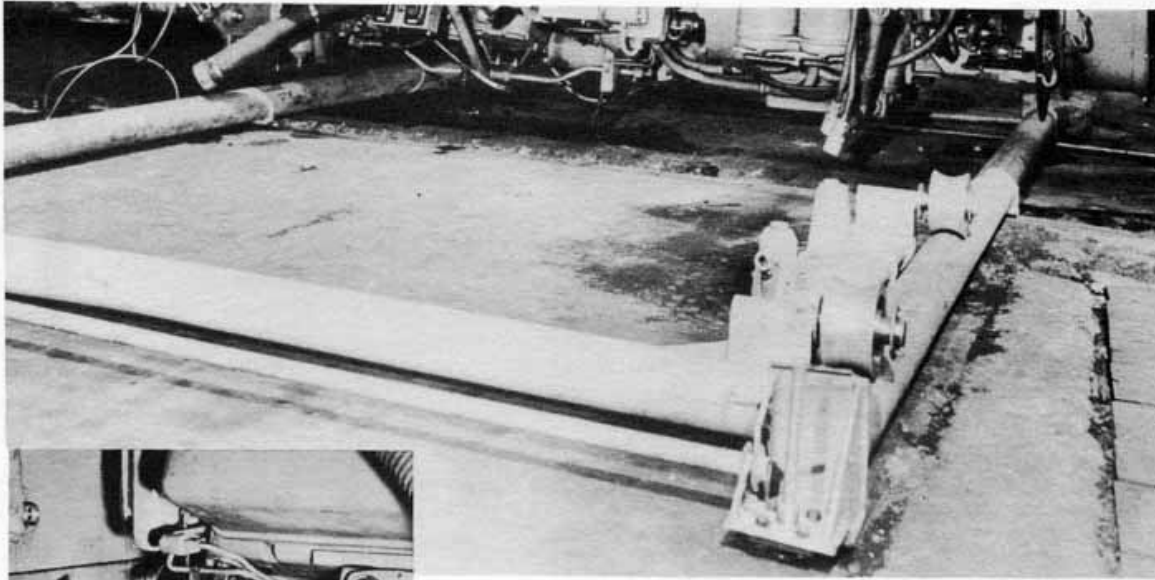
Illustrating method of removing horizontal diesel engine by means of hydraulic-jack fitted trolley.
